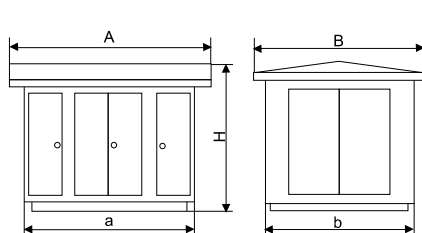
External drawing of ZBW series box-type transformer substation ("B" type configuration)
